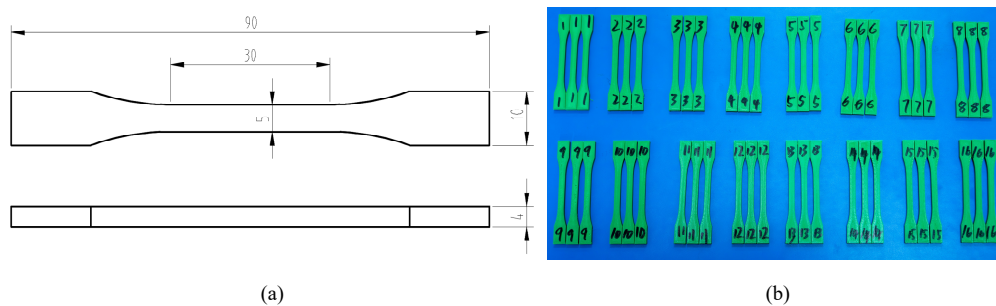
Schematic of tensile specimen geometry and dimensions (a) and photograph of as-fabricated test samples (b).
